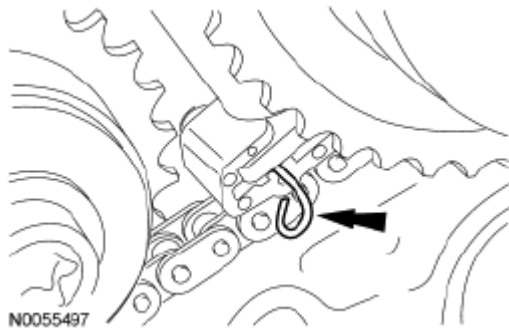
Locating RH Secondary Timing Chain Tensioner Lockpin
